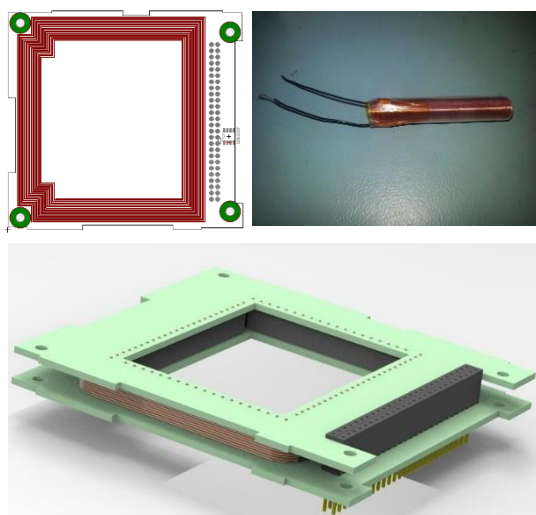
Embedded coil design (top left), manufactured torquerod prototype (top right), and combined air-core/embedded design (bottom).
